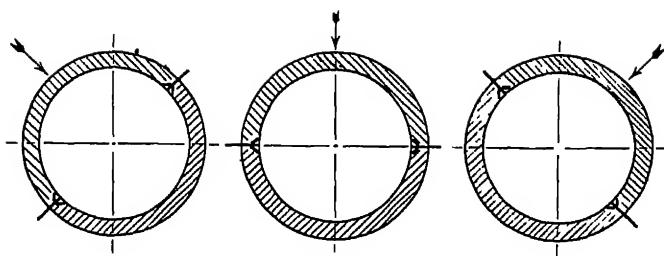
LINE DRAWING OF SPLIT BEARINGS
